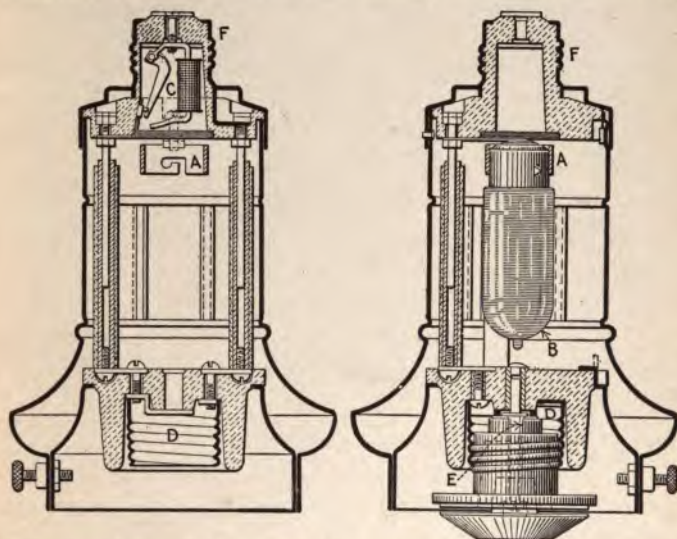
Sectional Views of Nernst Lamp Holder containing Cut-Out and Ballast.
